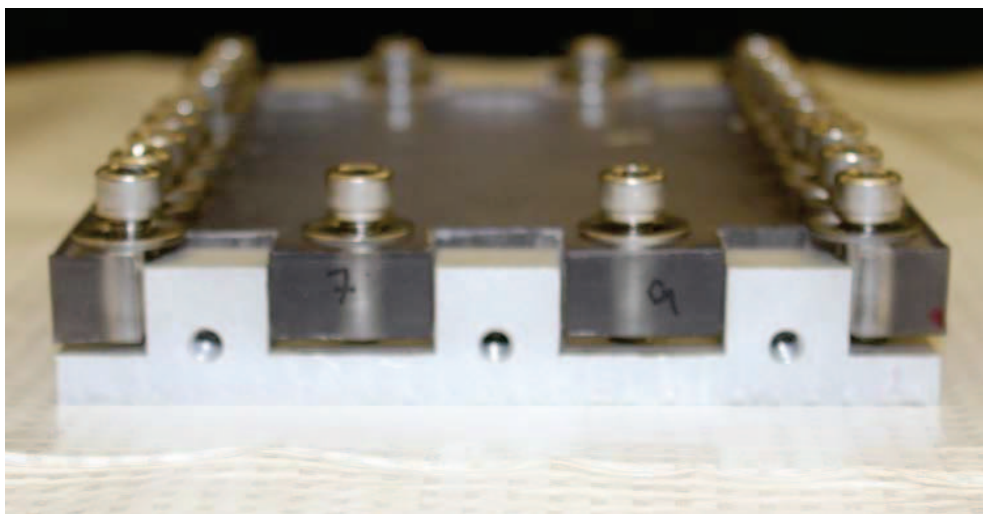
Side view of the assembled box with entrance/exit ports.
